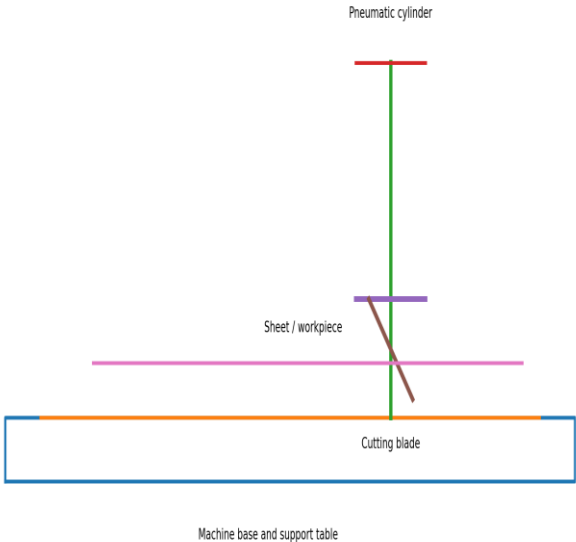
Representative mechanical arrangement of the fabricated pneumatic cutting machine.
